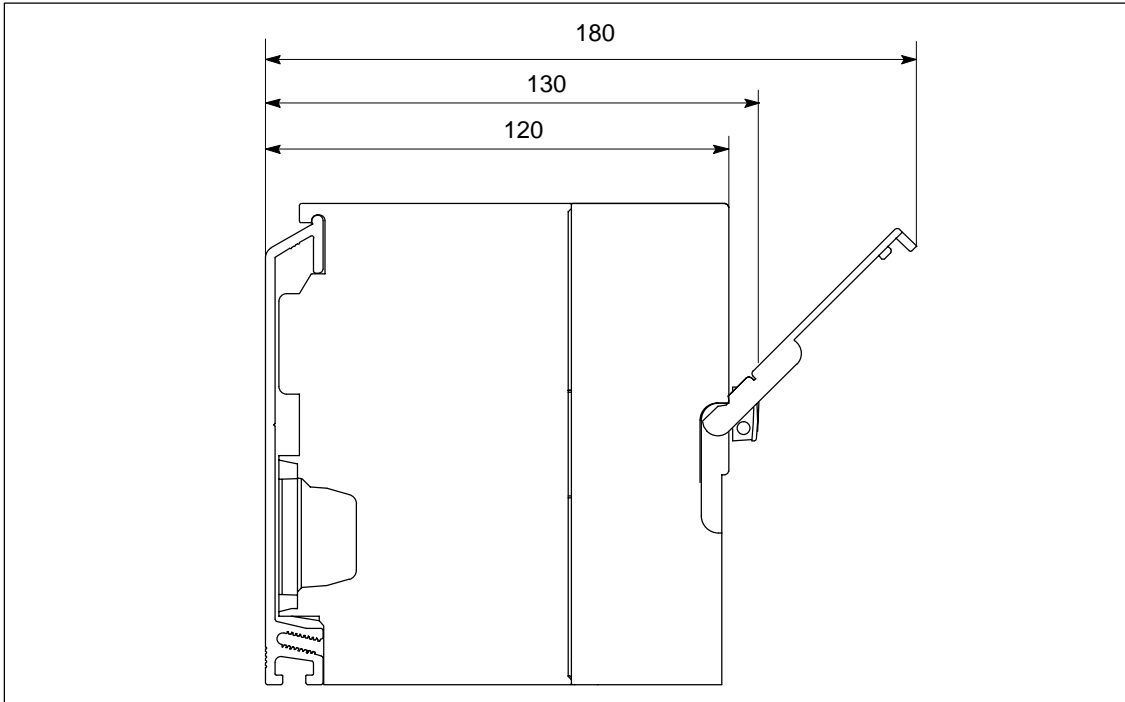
Dimensioned Drawing of the CPU 314 IFM, Side View
